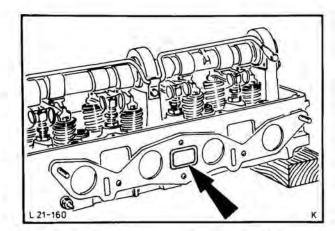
Apply sealing compound to either side of inlet manifold gasket
